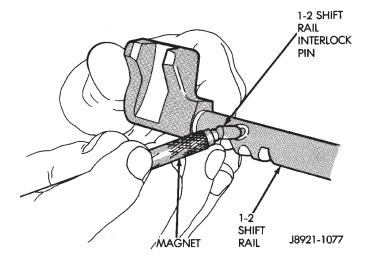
Remove 1-2 Shift Rail Interlock Pin
